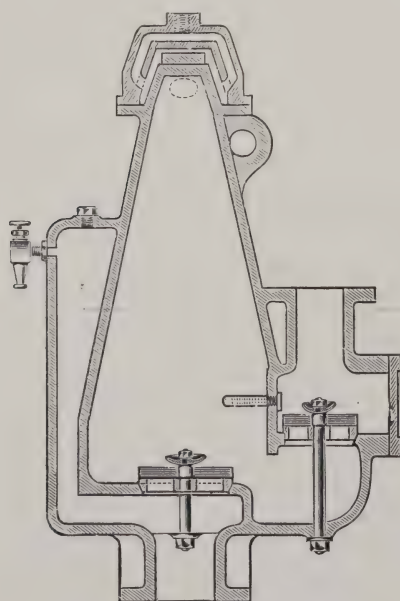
SECTIONAL ELEVATION OF "NIAGARA FALLS" PUMP.
